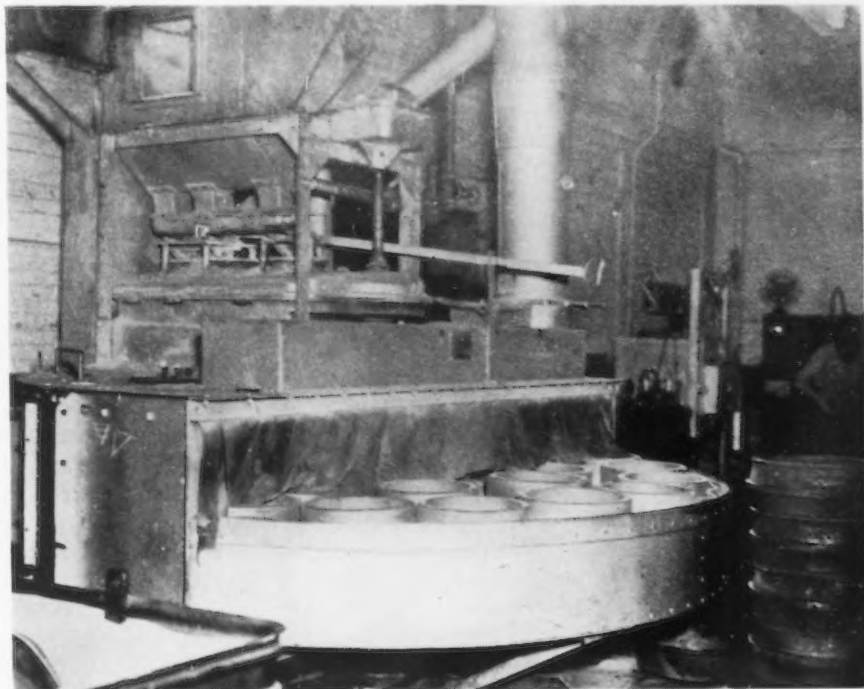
Rotary table blast machine used for cleaning bearing races of heat treating scale. The time required for cleaning is 20 to 25 min.
